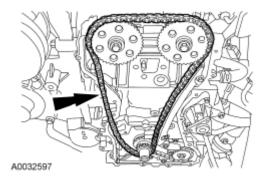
Locating Timing Chain Courtesy of FORD MOTOR CO.
